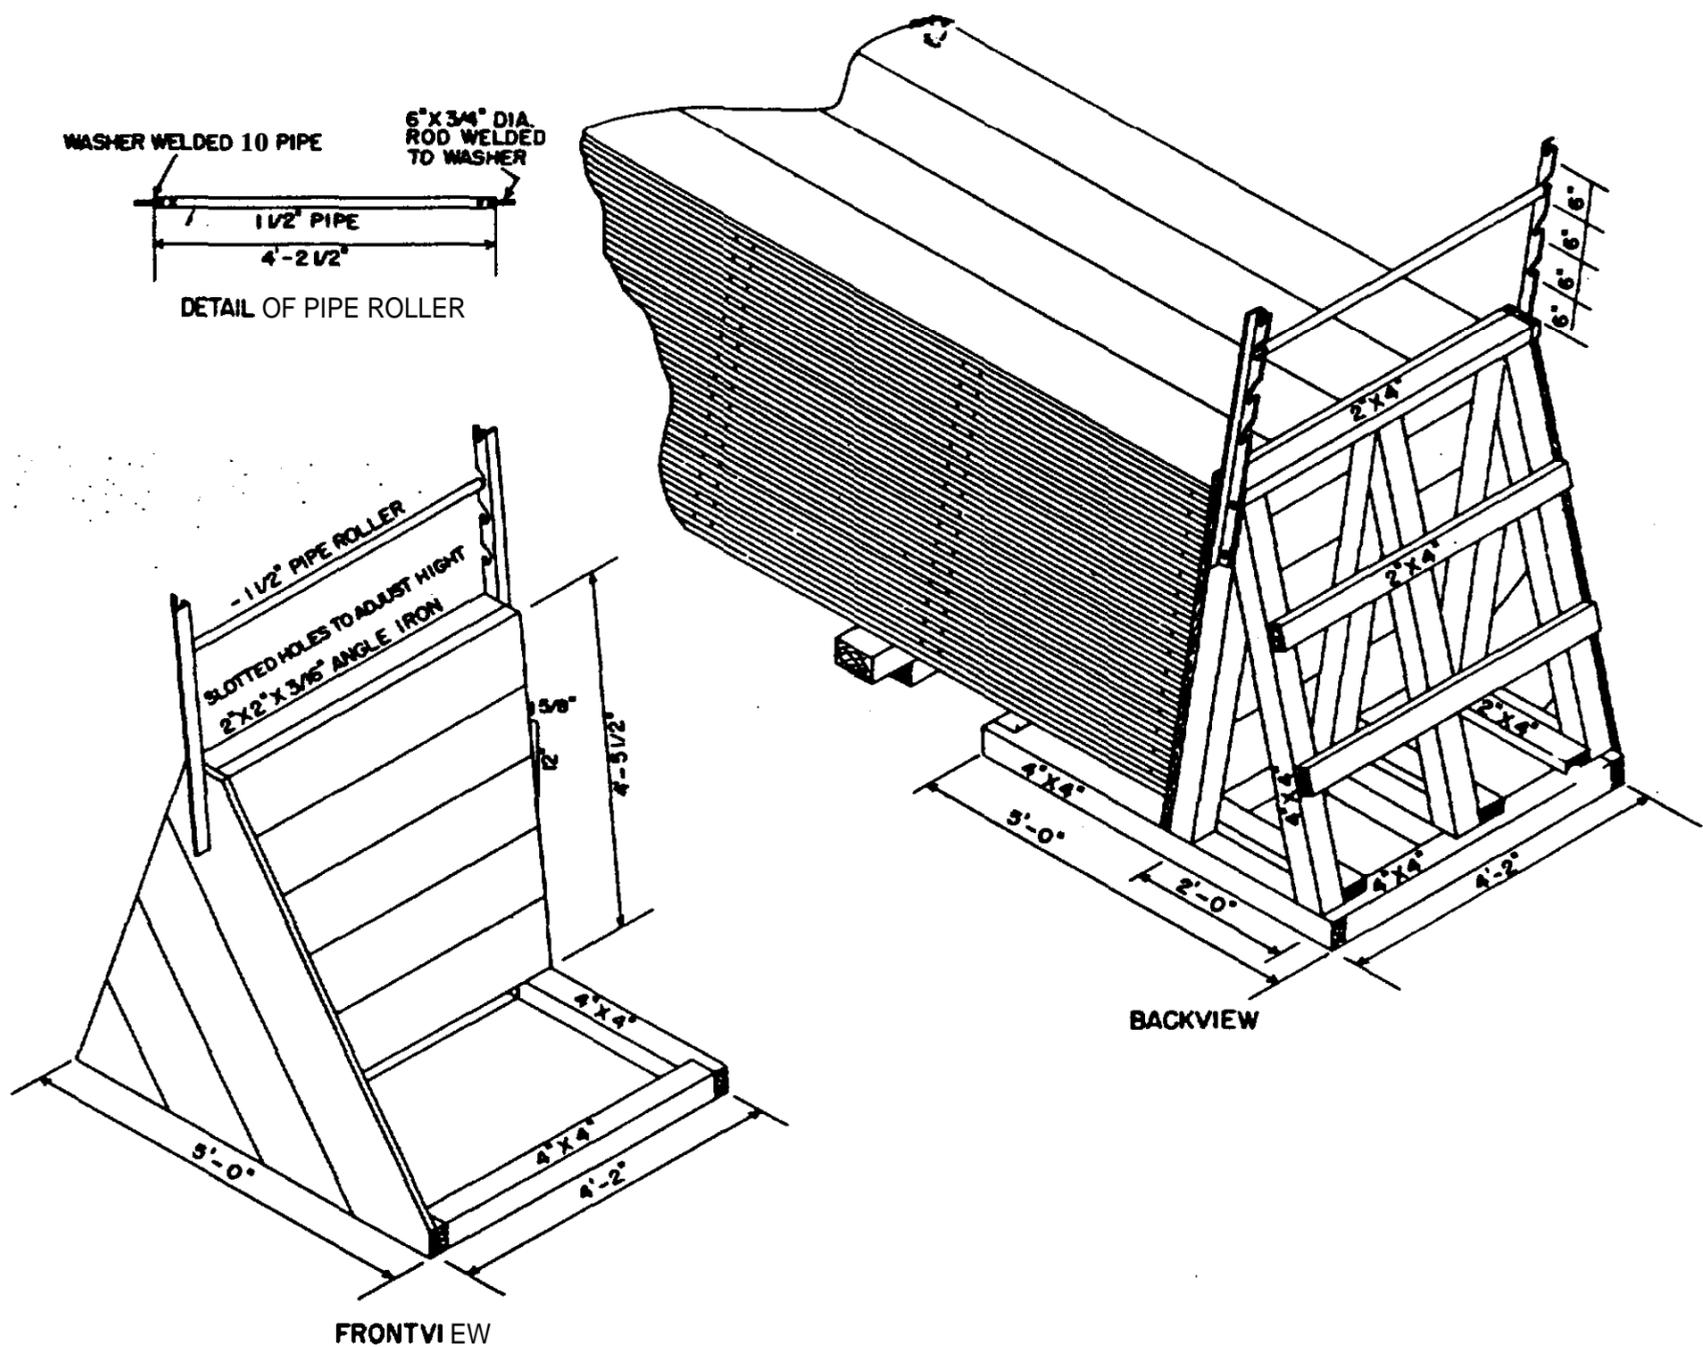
Diagram of butt boards used to control pitch on draft face.
